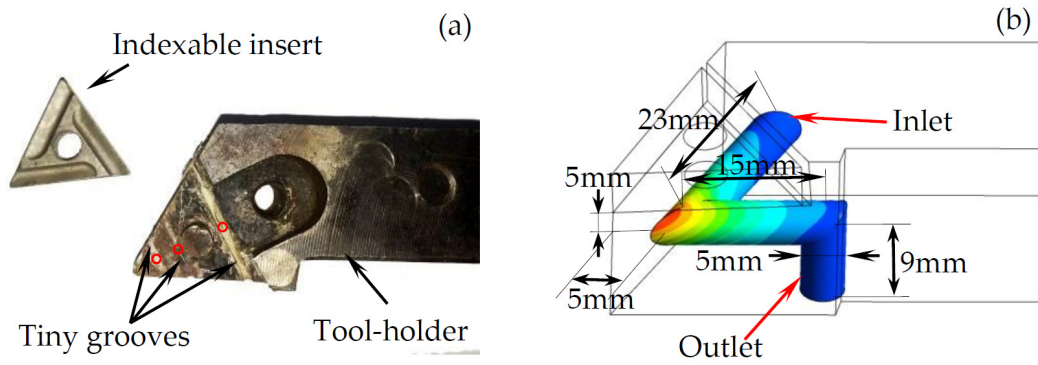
Schematic illustration of cutting tool assembly: (a) cutting tool; (b) the modified tool-holder with V-shaped channel.
